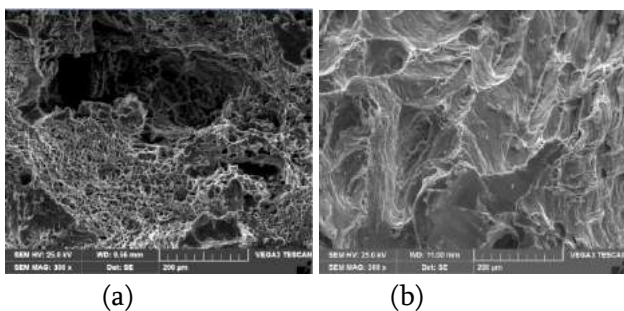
Sample of Fracture surfaces of the tensile test (a) Al2618 matrix alloy (b) Al2618-6wt. % B₄C composite
